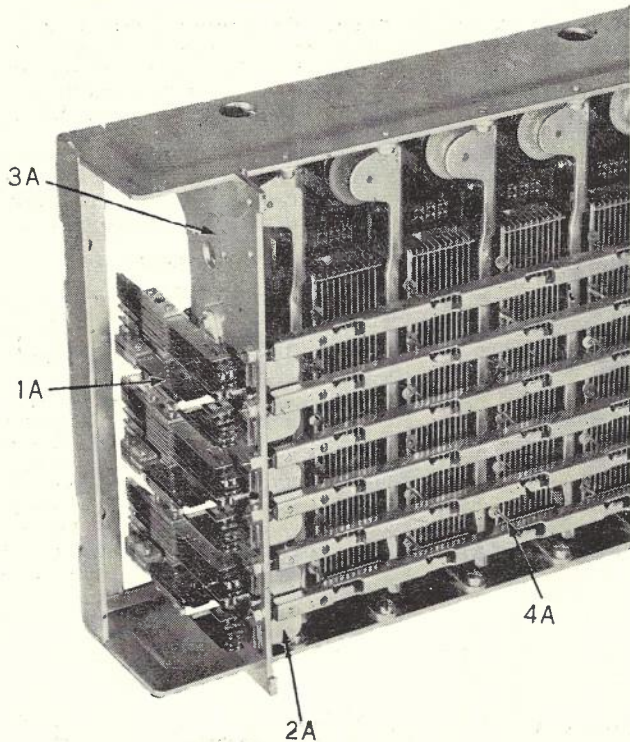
New Crossbar Switch showing Plain Buffer Springs (1A), New Shape of Horizontal Armature (2A), New Shape of End Plate (3A), Selecting Finger with Damper (4A).
